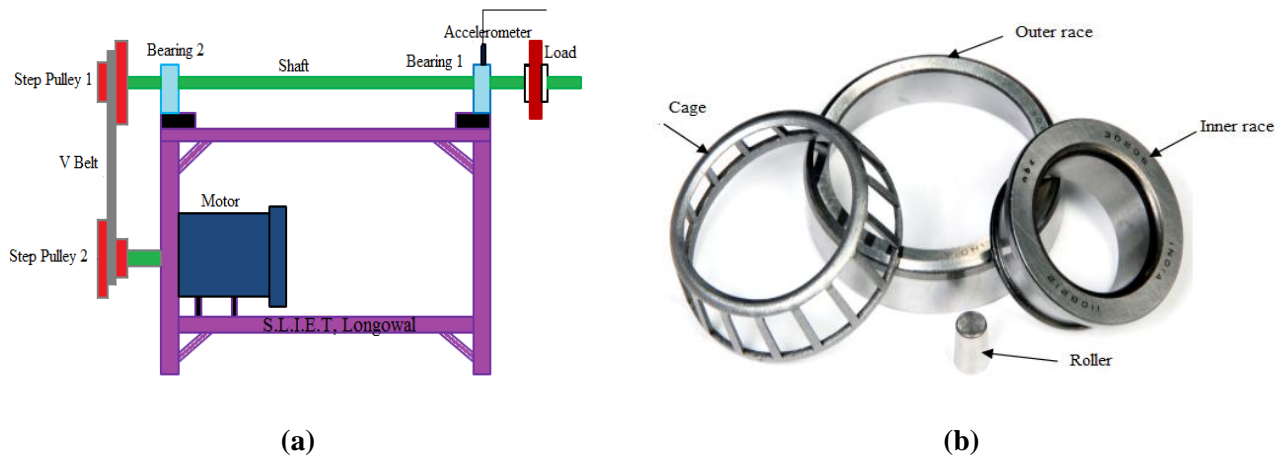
(a) Schematic diagram of experimental set up for measuring defect frequency and (b) A typical photograph of taper roller bearing (Bearing no: NBC 30205)
